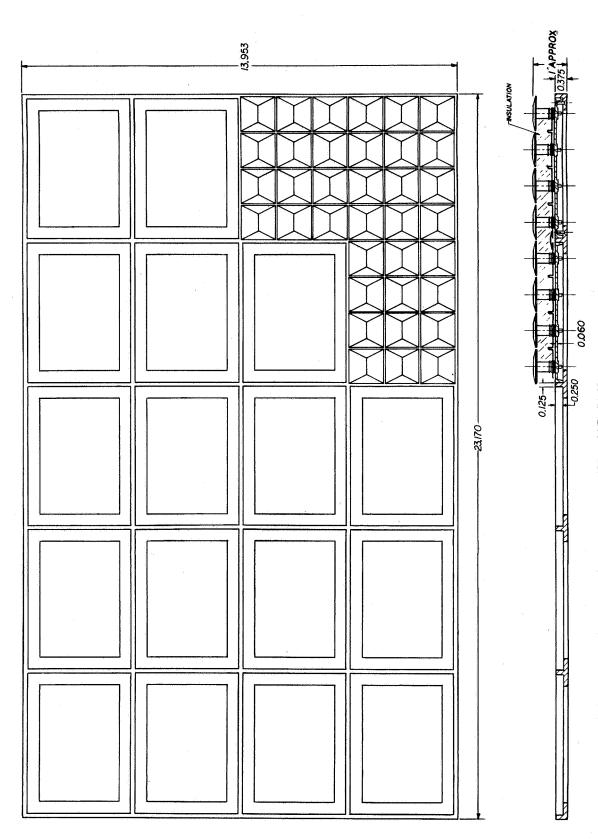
REFERENCE DESIGN-GENERATOR PANEL ASSEMBLY
